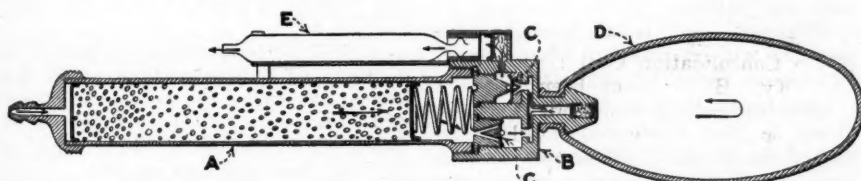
LONGITUDINAL SECTION SHOWING CONSTRUCTION OF DEVICE
